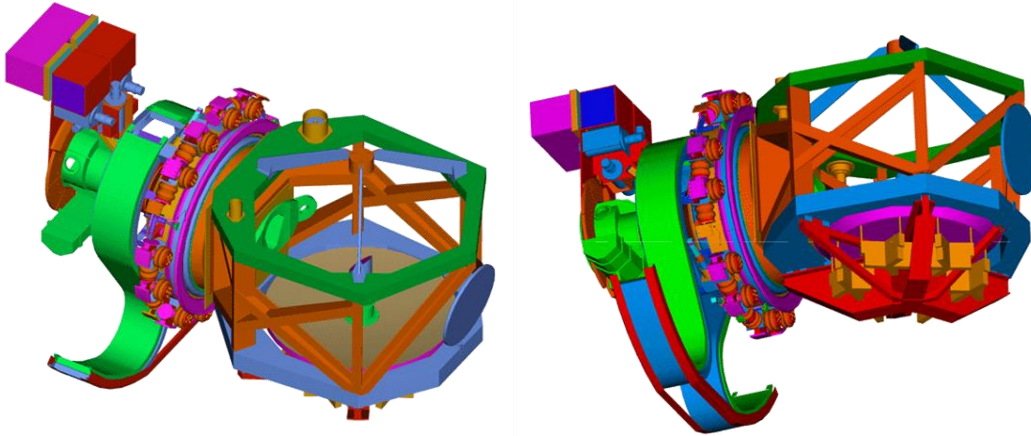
Two views of the 3D CAD models of the telescope showing both sides and attachment to bulkhead.
